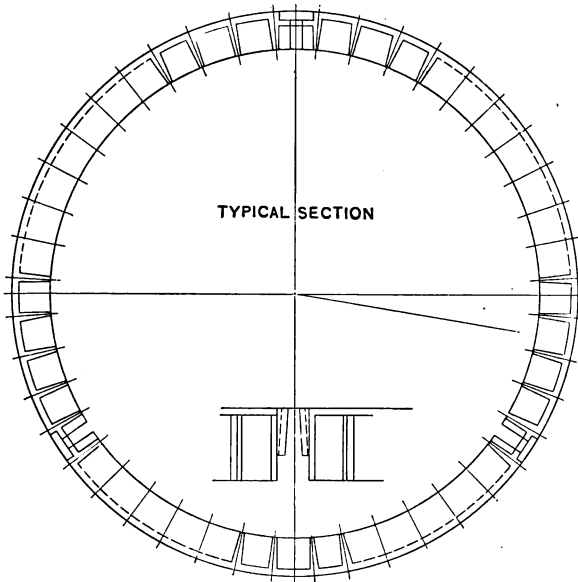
Typical section of El Oro lining wedged in mill without bolts through the shell. (S. R. Mfg. Co.)
